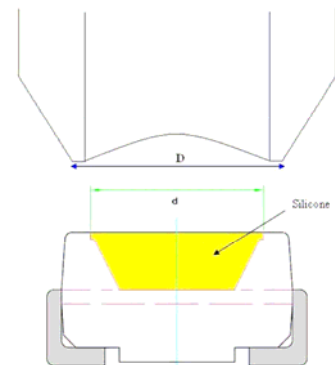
Pick & place nozzle diameter (D) should be larger than the opening (d)
